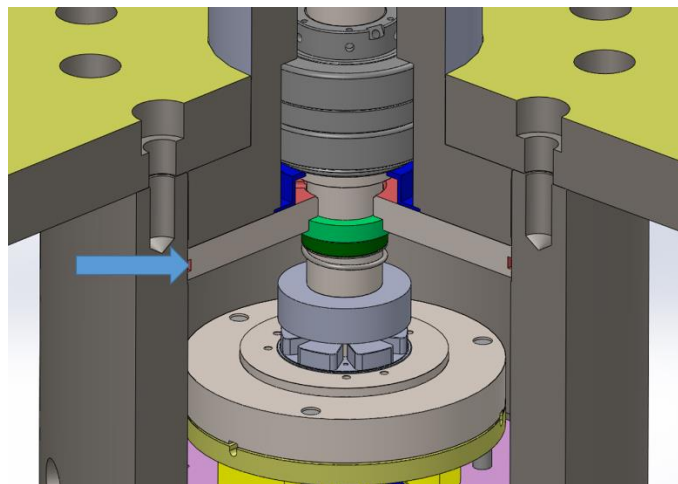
Test bearing chamber and slave bearing chamber seal. Arrow indicates O-ring placement
